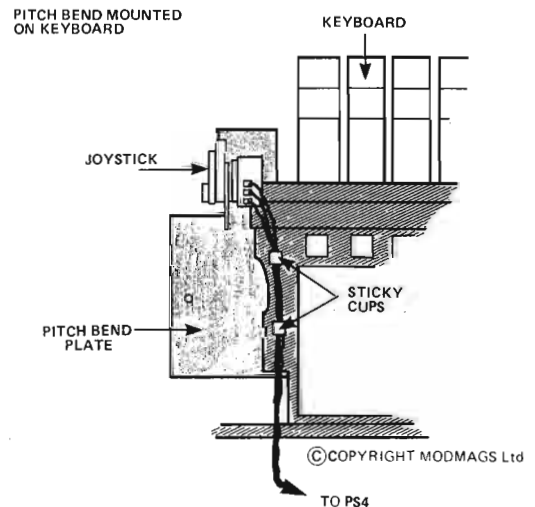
Mounting the joystick pitch bend control (RV33) on the end of the keyboard.
